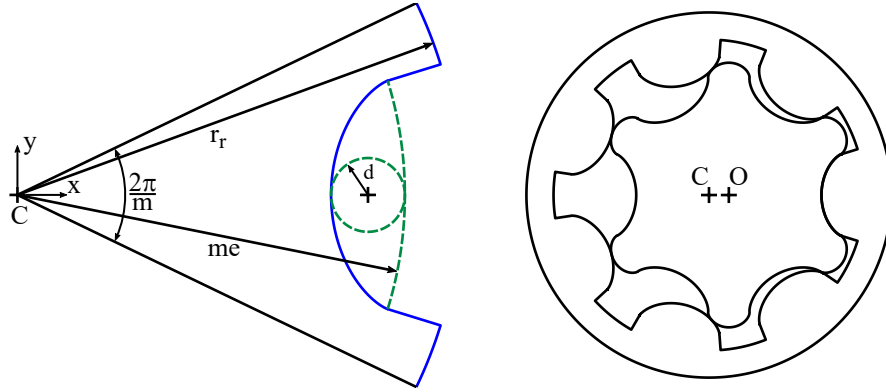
Standard cycloidal gerotor outer gear tooth form with $m = 7$, $e = 3$ mm, $d = 2$ mm, and $r_r = 23.5$ mm (left) with complete outer and matching inner gears (right) [27]
